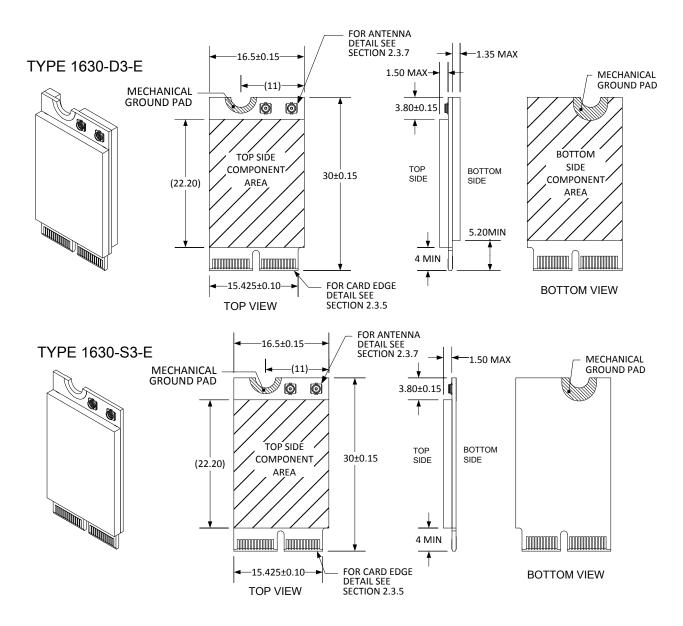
M.2 Type 1630-D3/S3 Mechanical Outline Diagram Examples
